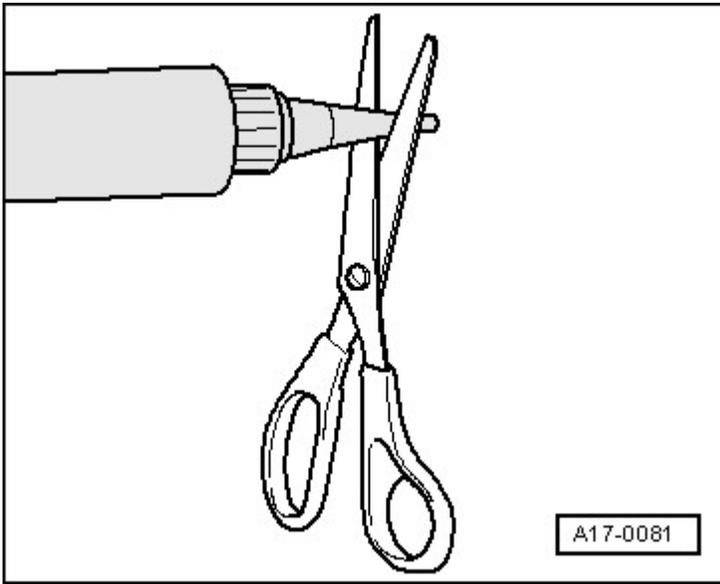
Cutting Tube Nozzle At Front Marking (Nozzle Diameter Approx. 3 Mm)
